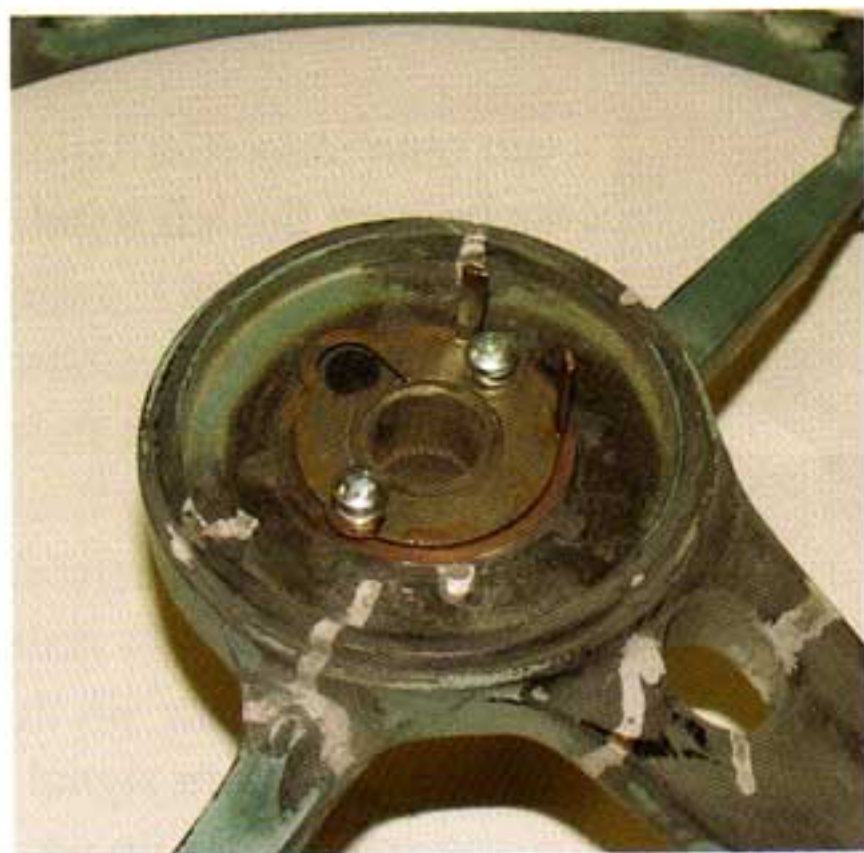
The turn signal canceling cam attaches to the bottom of the steering wheel with two #8 machine screws. Both parts are included in the rebuild kit. The fingers on this cam make contact with the canceling pawls to turn the turn signals off after completing a turn.
